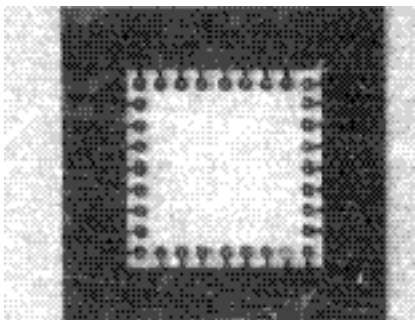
LLNL fabricated numerous 250µm disks, each containing a 50µm hole, by laser machining the 50µm thick beryllium flat pictured above.
